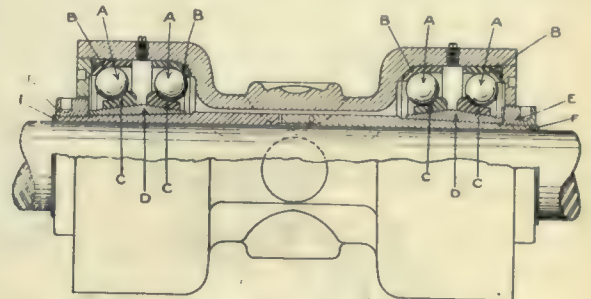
Double Ball-bearing for Extra Heavy Duty.
